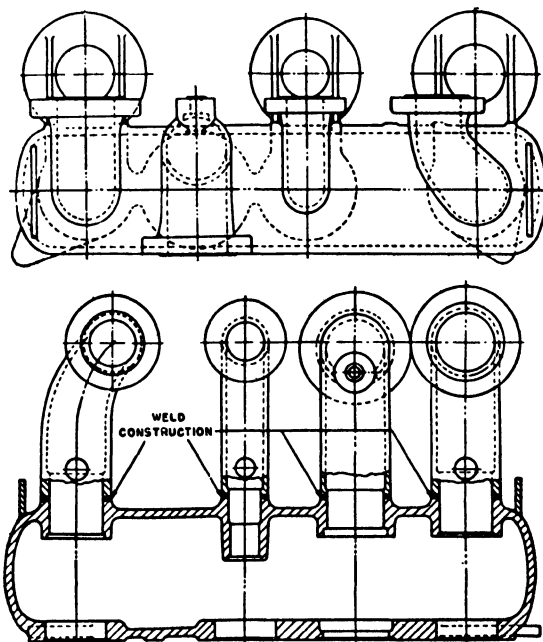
Throttle-valve casting—cast-weld construction. (*Briggs, Gezelius, and Donaldson.*⁽⁴⁸⁾)
